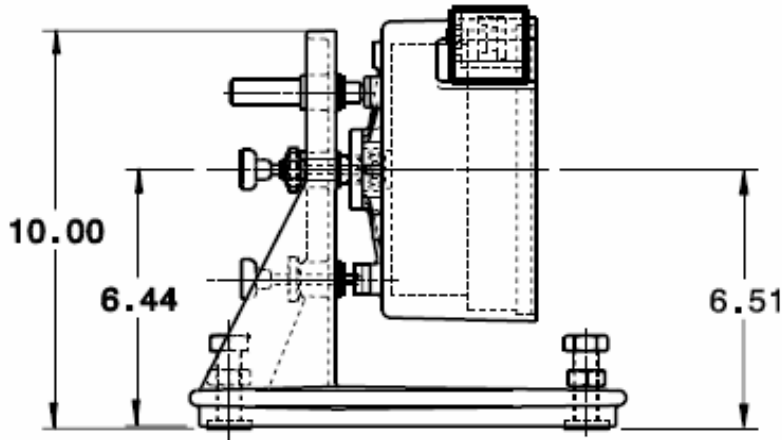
COTS mount drawing for a 6 inch OAP from SORL (inches).
